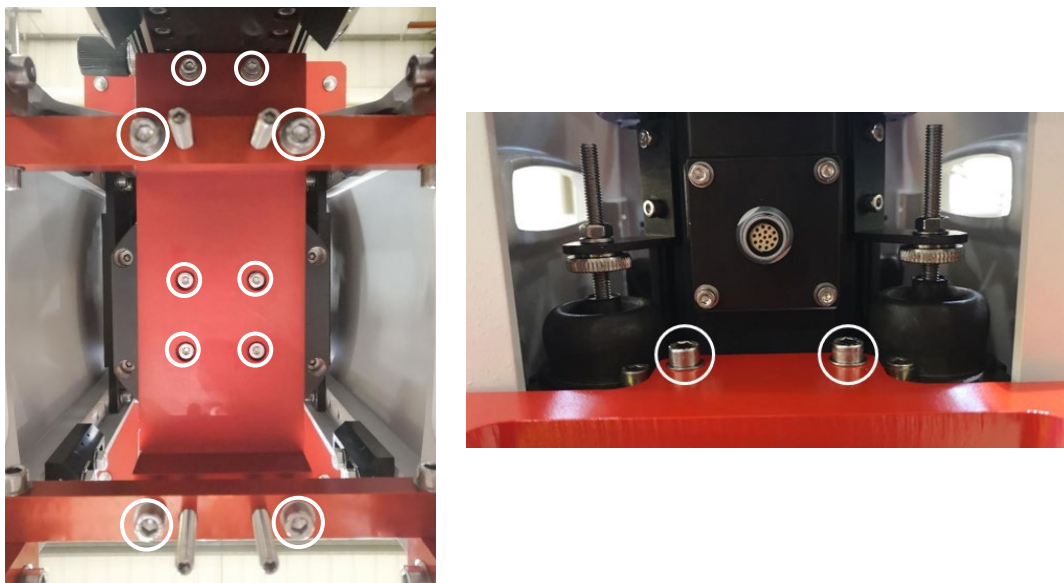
Bolts to be removed to free the shipping plate (Left) and lifting plates (Right)
